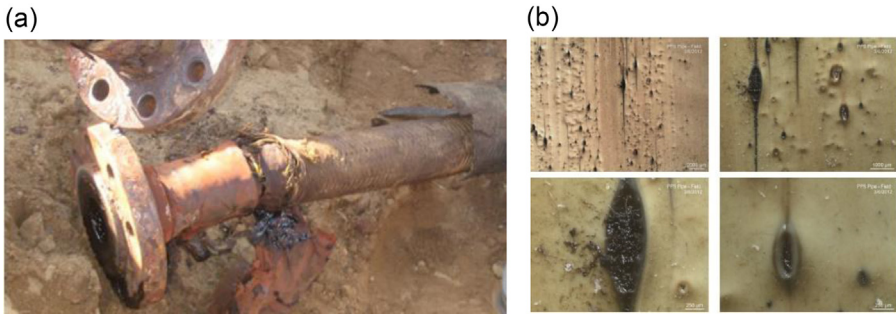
Reinforced thermoplastic pipe line failure showing failure of liner, reinforcement fibers, and outer jacket (a) and blistering and cracking of the liner with the axial markings are manufacturing anomalies (b).
